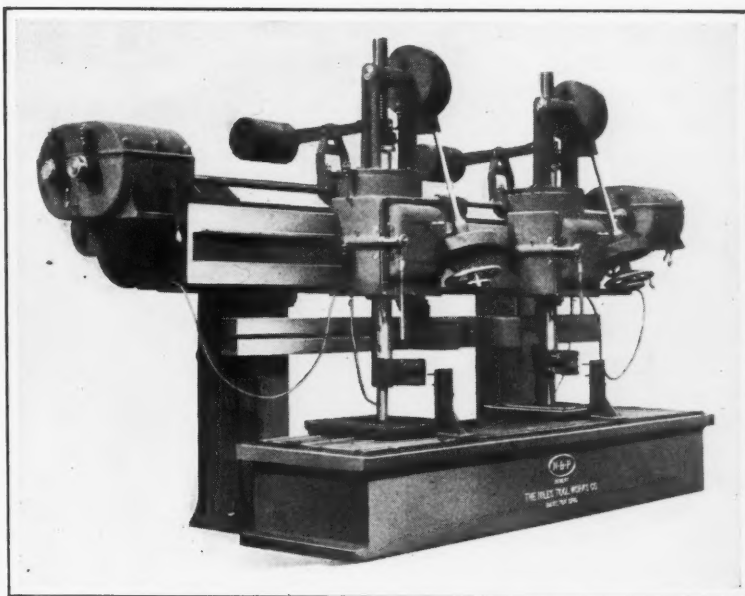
Niles Locomotive Connecting-rod Boring Machine
